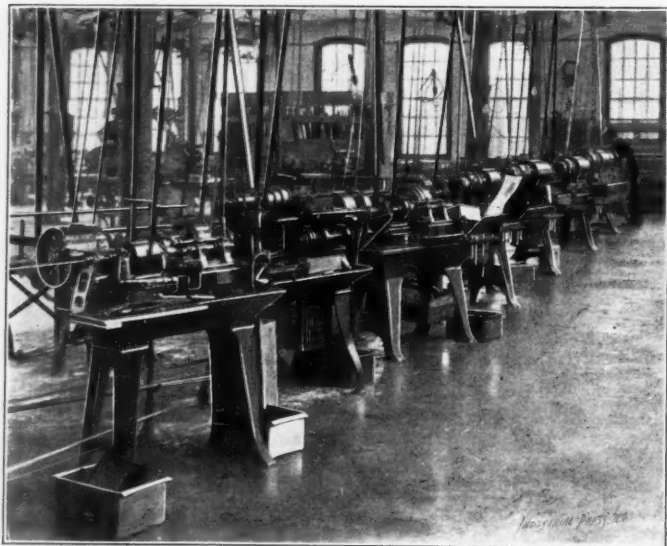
Row of Screw Machines making Rollers and other Small Parts of Bearings.
